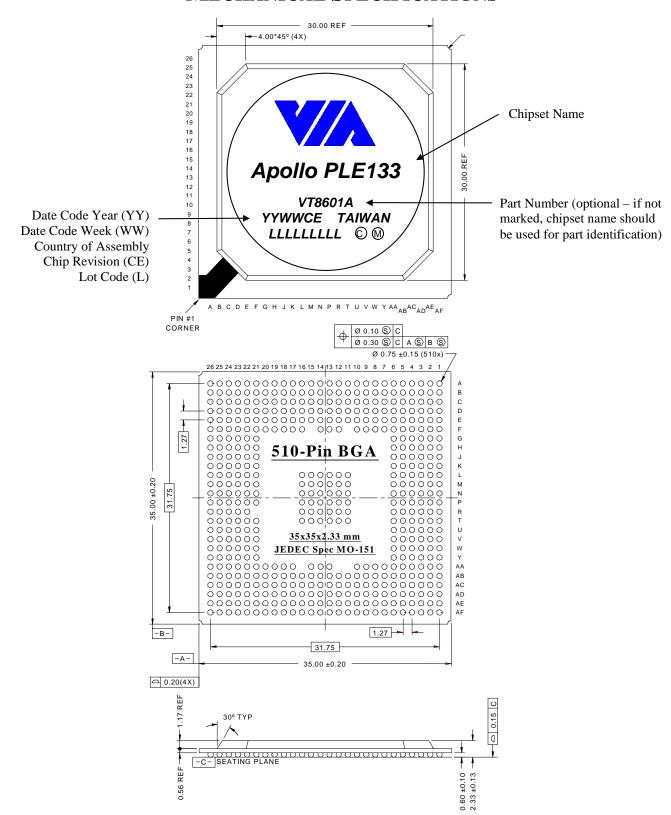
Mechanical Specifications - 510-Pin Ball Grid Array Package
